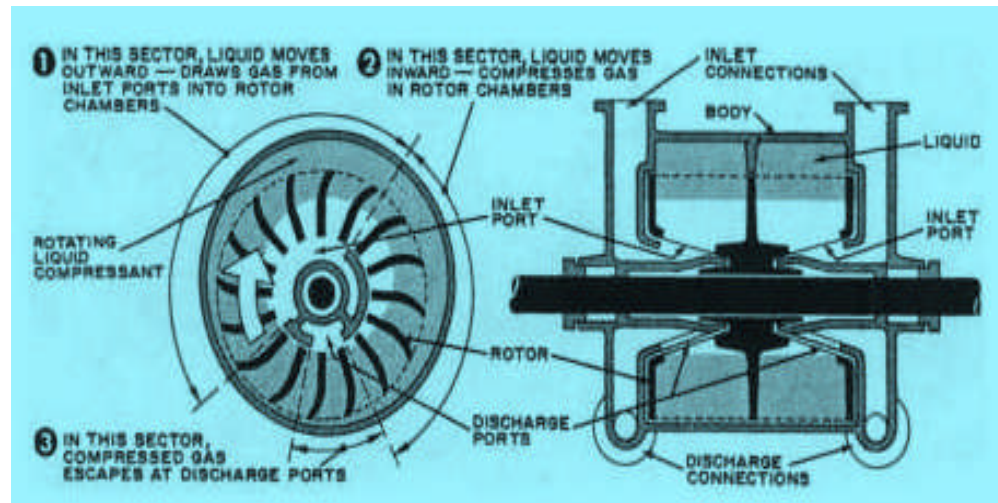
A sectional and end view of a liquid piston compressor. (Courtesy of Nash Engineering Co.)
